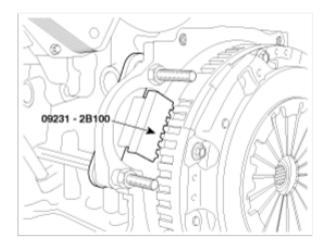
Holding Ring Gear Using SST (09231-2B100) Courtesy of HYUNDAI MOTOR AMERICA
